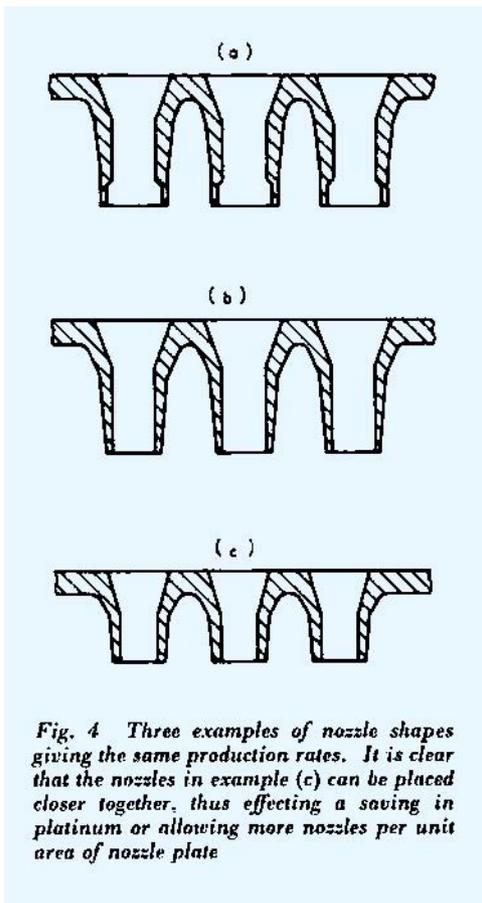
Three examples of nozzle shapes giving the same production rates. It is clear that the nozzles in example (c) can be placed closer together, thus effecting a saving in platinum or allowing more nozzles per unit area of nozzle plate
